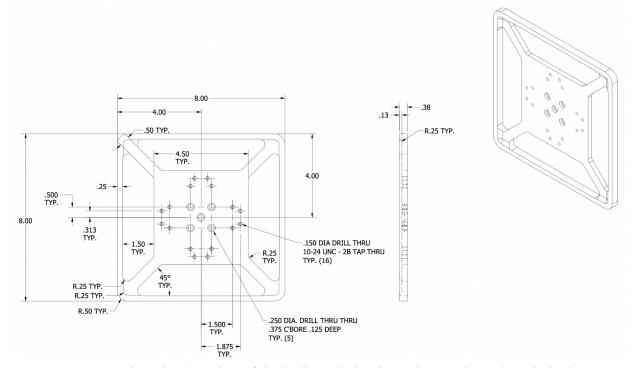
Engineering drawing of the hollowed aluminum base. Dimensions in inches.
